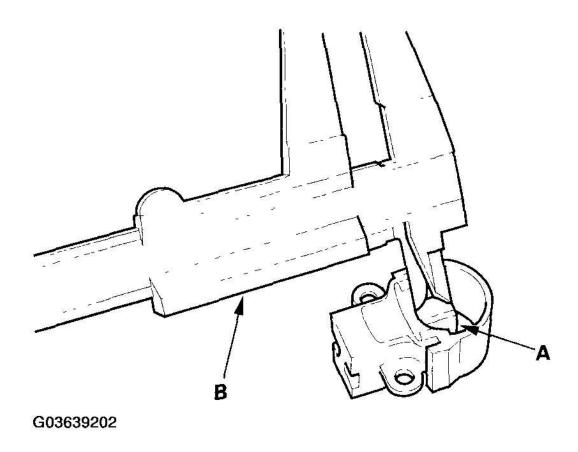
Measuring Length Of Brushes With Vernier Calipers Courtesy of AMERICAN HONDA MOTOR CO., INC.
